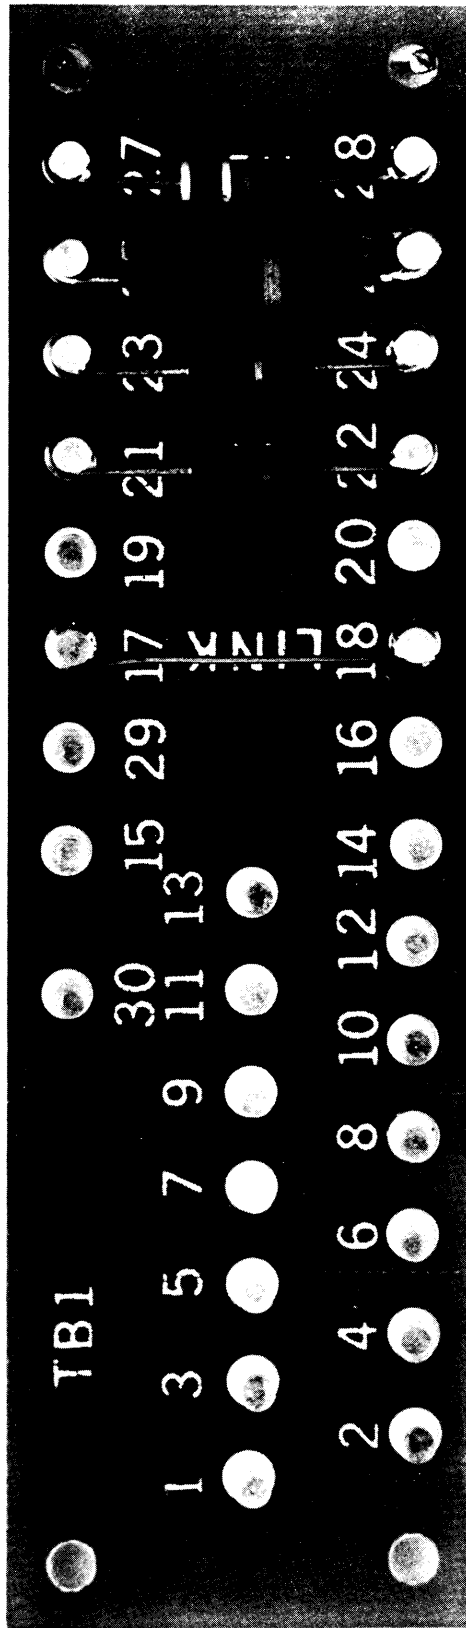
COMPONENT & TERMINAL BOARD, A10919, DCS-1C
